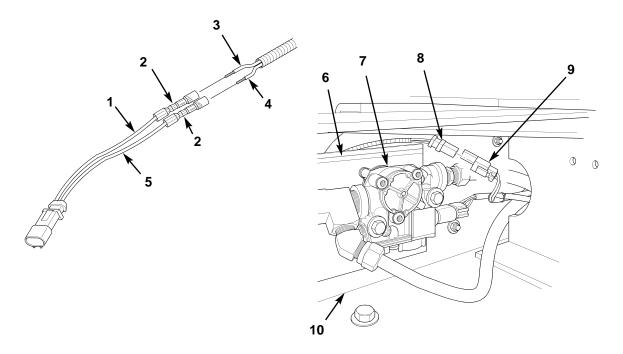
Connecting Wheel Sensor at Rear-Rear Axle.
